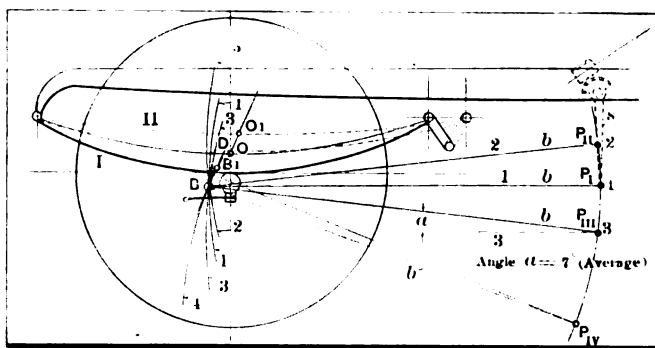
Illustrating imperfect design as a cause of wobbling steering wheels
